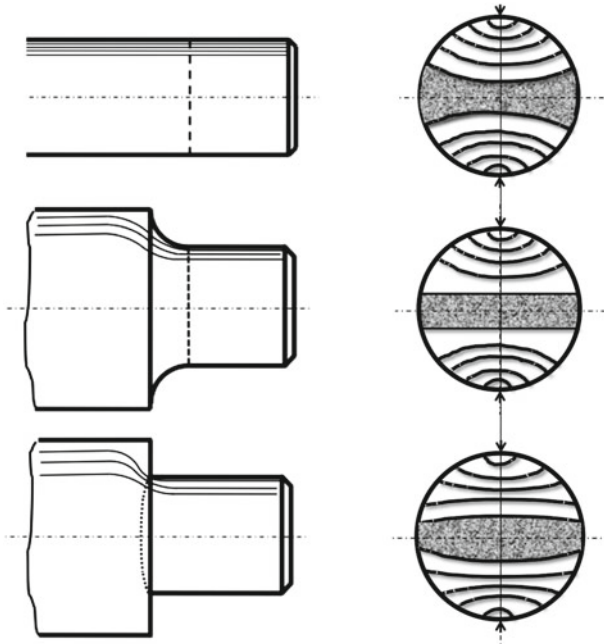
Fracture surface for shafts in bending at stress rate $R = -1$
